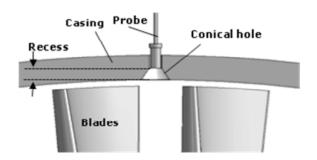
Probe installation into the engine. The probe is mounted toward the blades
